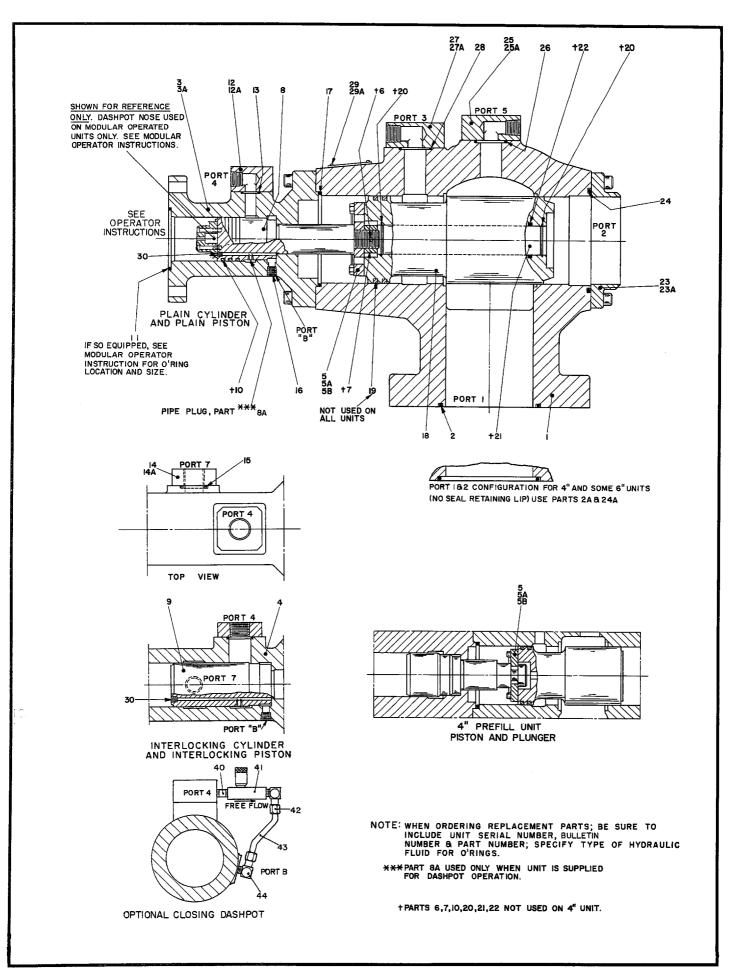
Parts Drawing, Size 100, 150 and 200 Basic Prefill Valves Without Operators DS-986304D (504058D).
